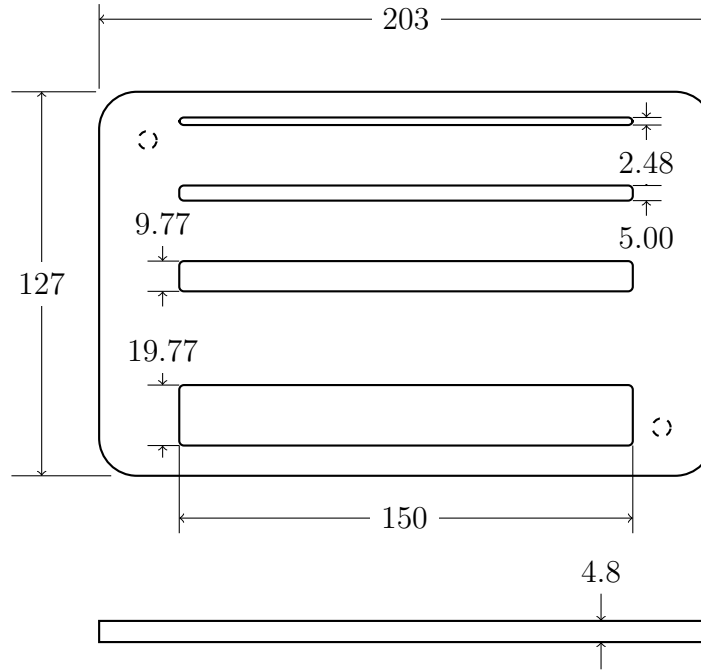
Cover for mold so the exposed surface is a spanwise series of rectangular strips. All dimensions in millimeters.
